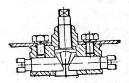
Brake shoe adjuster (9 h.p. and 4A).
